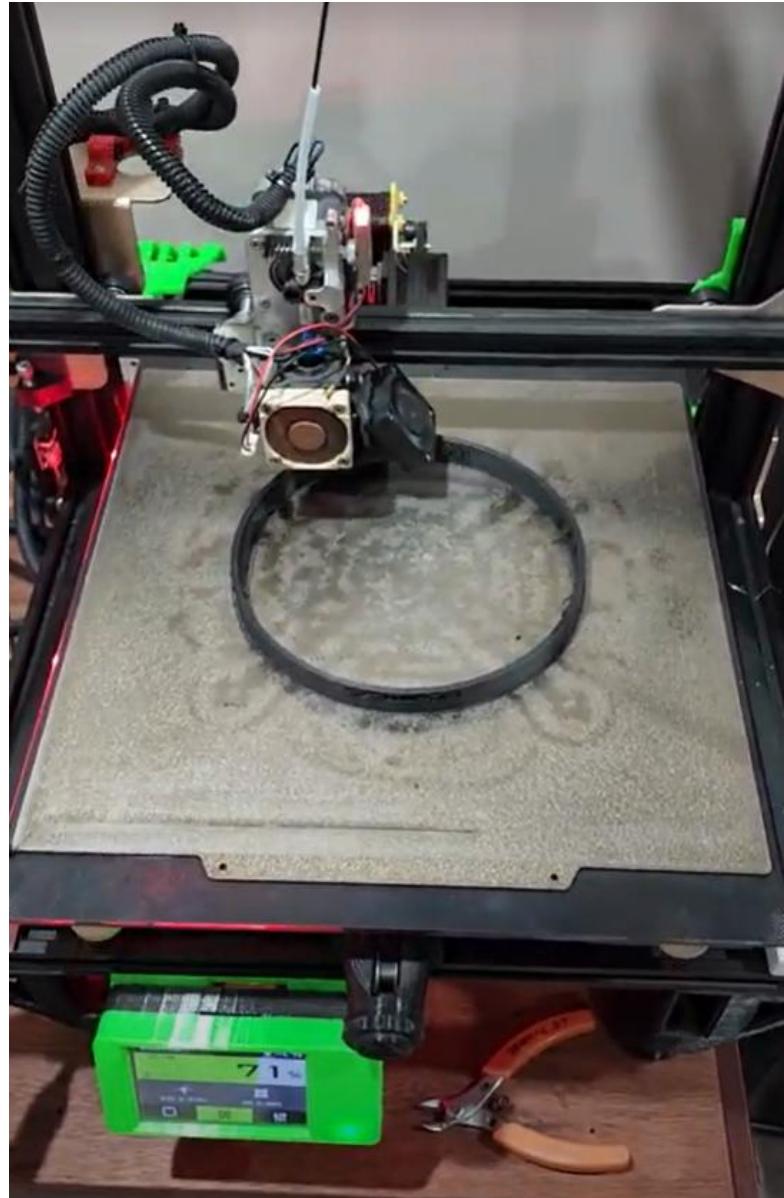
Homemade 3D printer setup that will be used for printing the parts required to make the hydroponics.
